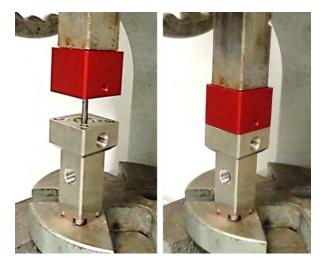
Use the Press to Fully Engage the Rod in the Fluid Section
